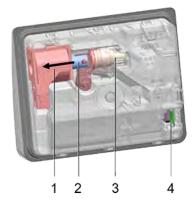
Dispenser cutaway showing internal parts (rear view)
